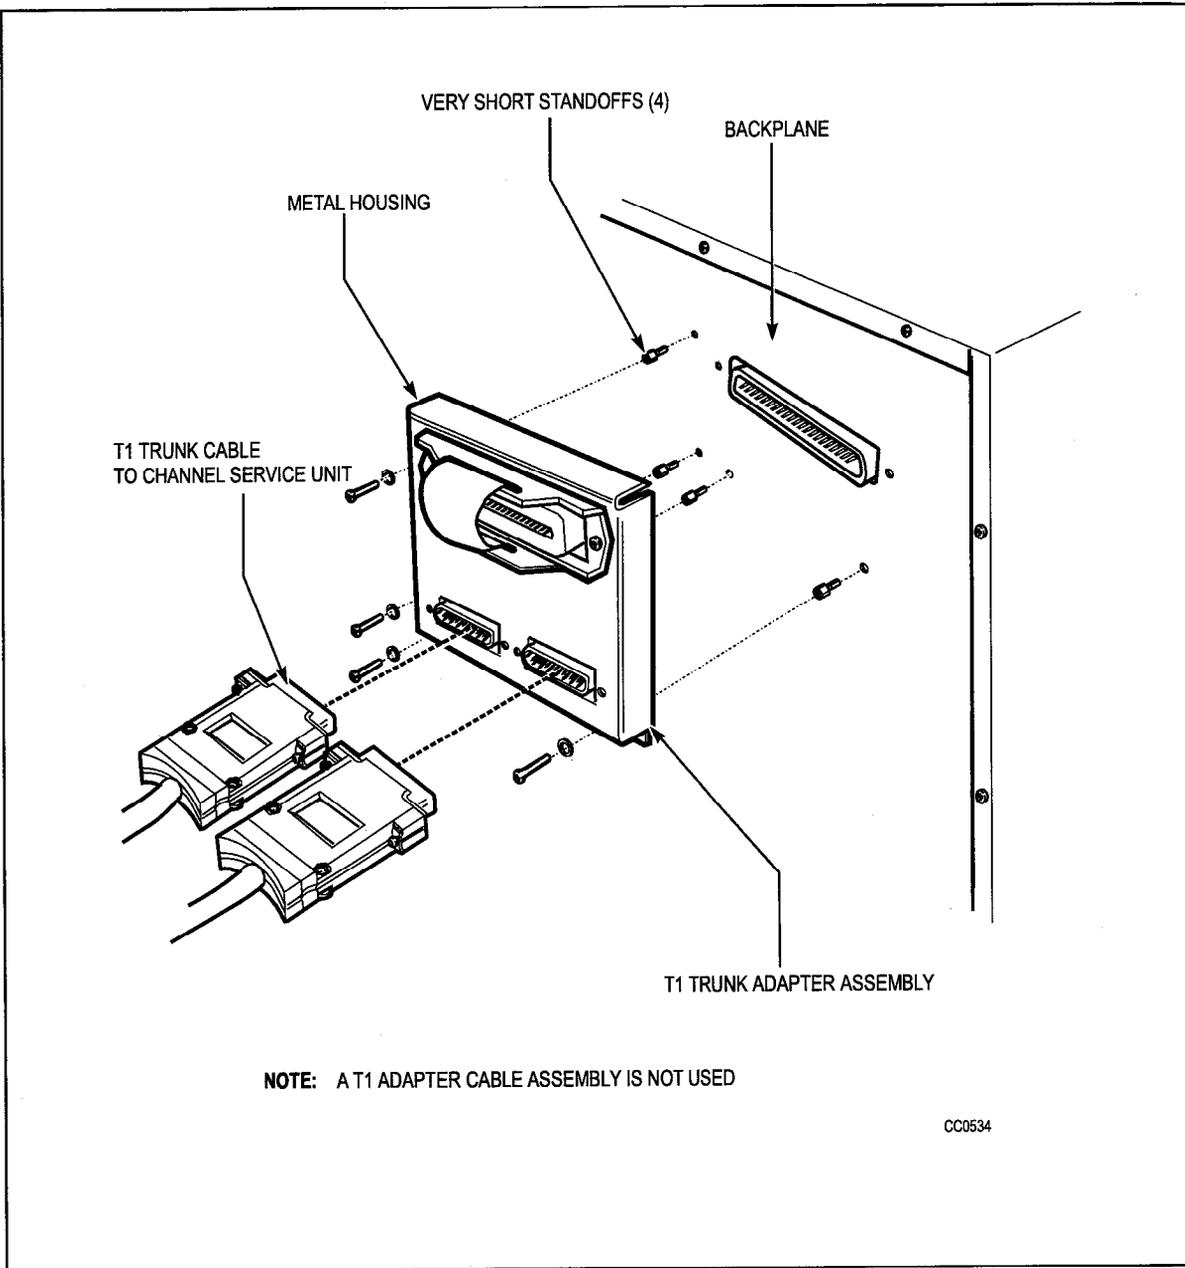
Install a Dual T1 Trunk Adapter Assembly on an SX-200 PABX
